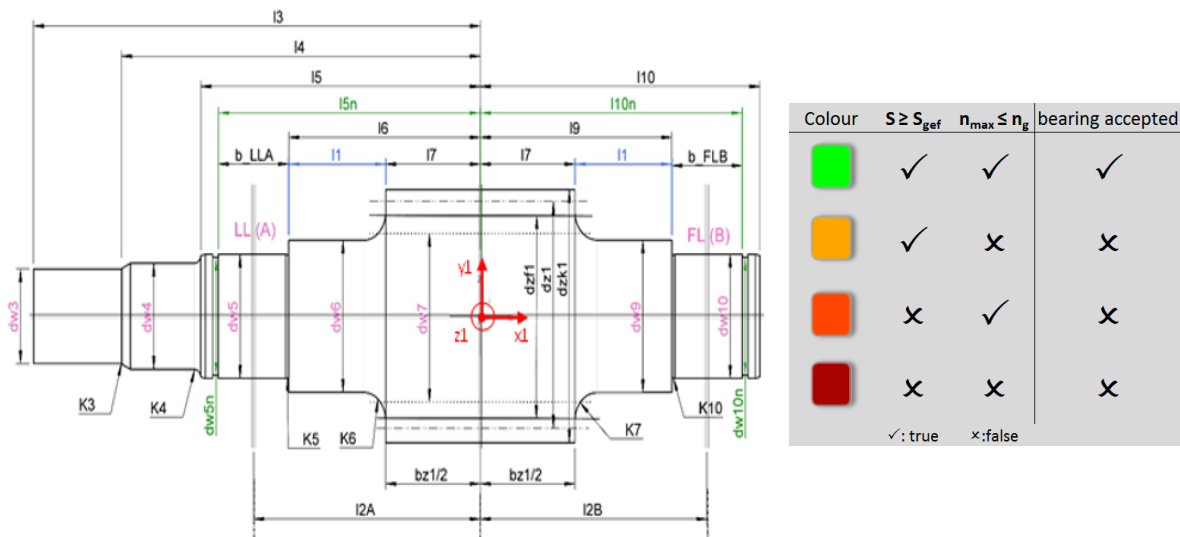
parametrical model of a gear shaft (left); suitability of different bearings (right)
